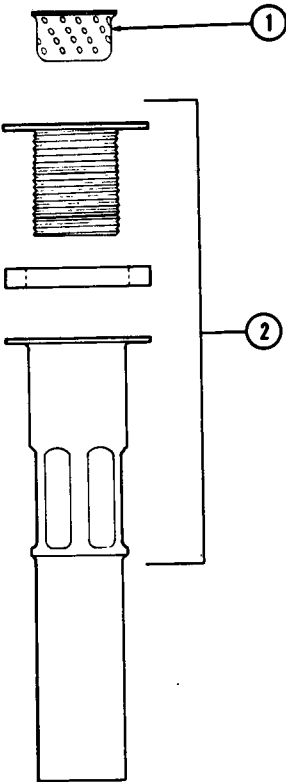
DRAIN ASSEMBLY (NEW STYLE).
